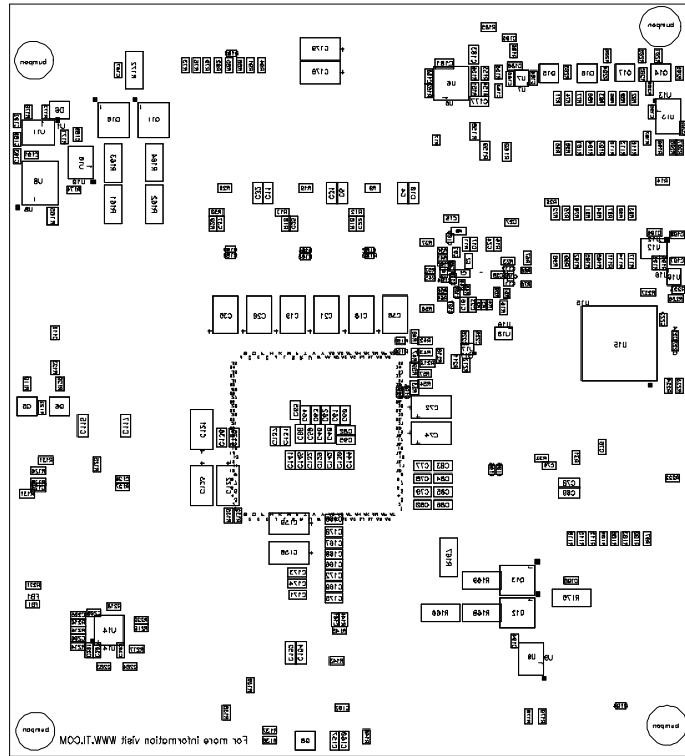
TPS59640EVM-751 Bottom Assembly Drawing (Bottom View)
